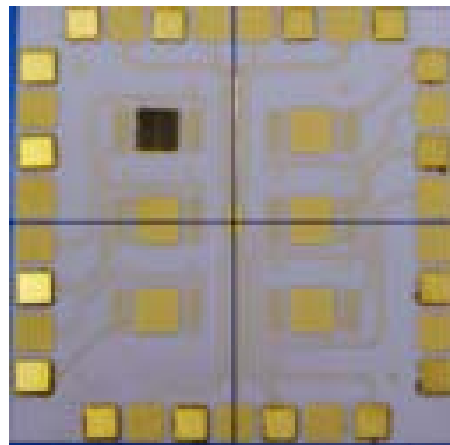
Wire Welding Substrates with Peripheral Moly Tabs Attached
